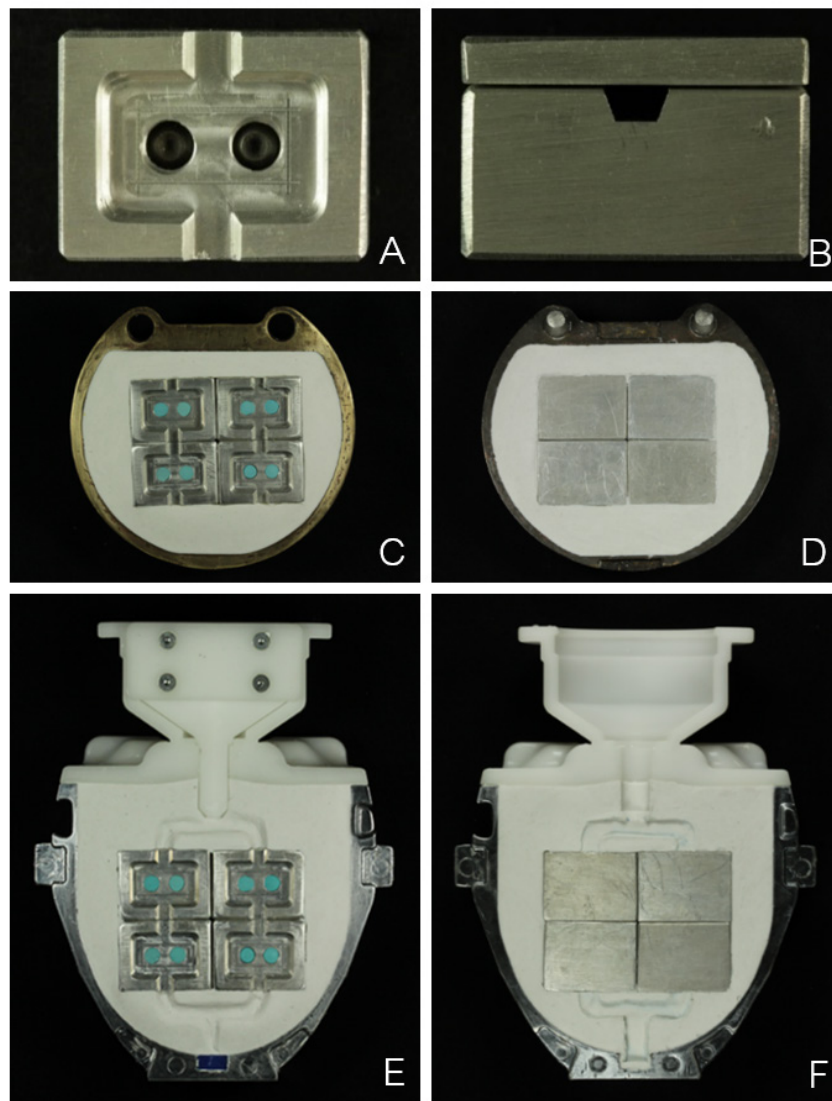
(A) Rectangular steel mold had space inside with a rectangular groove at the bottom of the mold. (B) A metal lid covers the mold and shows the channel for injection molding technique. (C) Lower half flask of conventional compression technique. (D) Upper half flask of conventional compression technique. (E) Lower half flask of injection molding technique. (F) Upper half flask of injection molding technique
